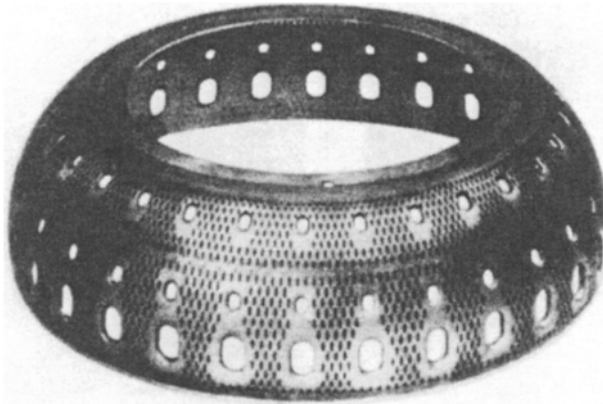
Housing for a jet engine combustor with electron beam drilled cooling holes. (Reprinted with permission from *ASM Metals Handbook, Ninth Edition*, Vol. 16, Machining (1989), ASM International, Materials Park, OH 44073-0002, p. 571, Fig. 8.)
